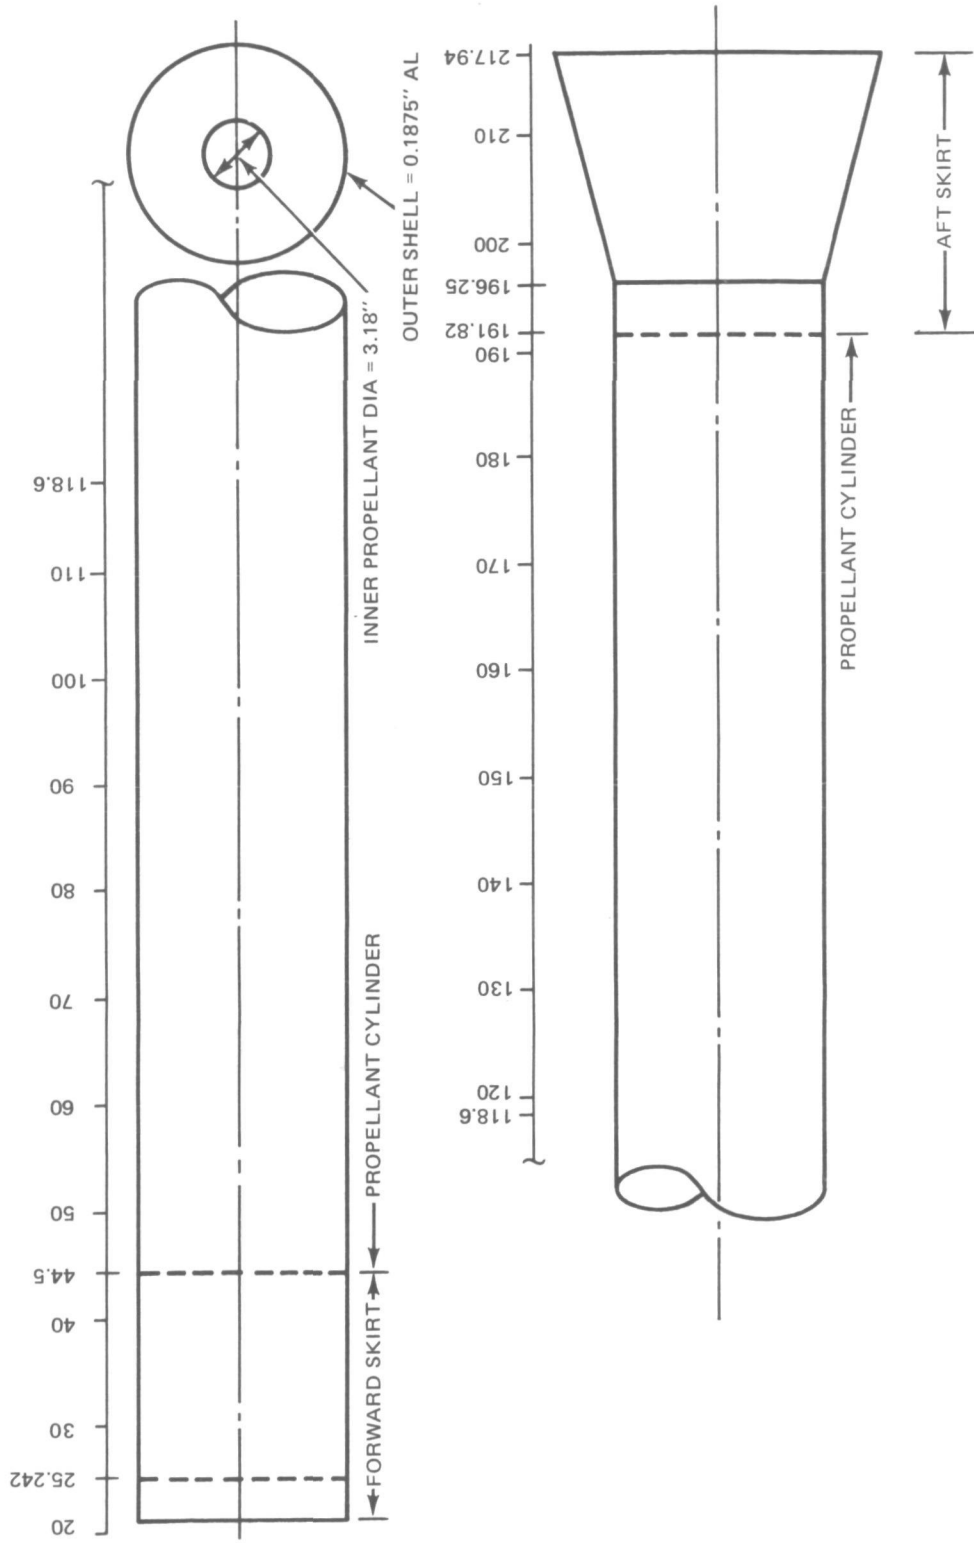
Assembled View of 1/8-Scale Model of the Solid Rocket Booster
